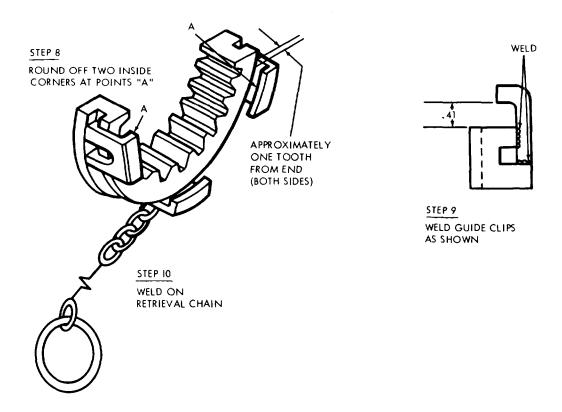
Final drive adapter hook-up tool (Sheet 2 of 2).
